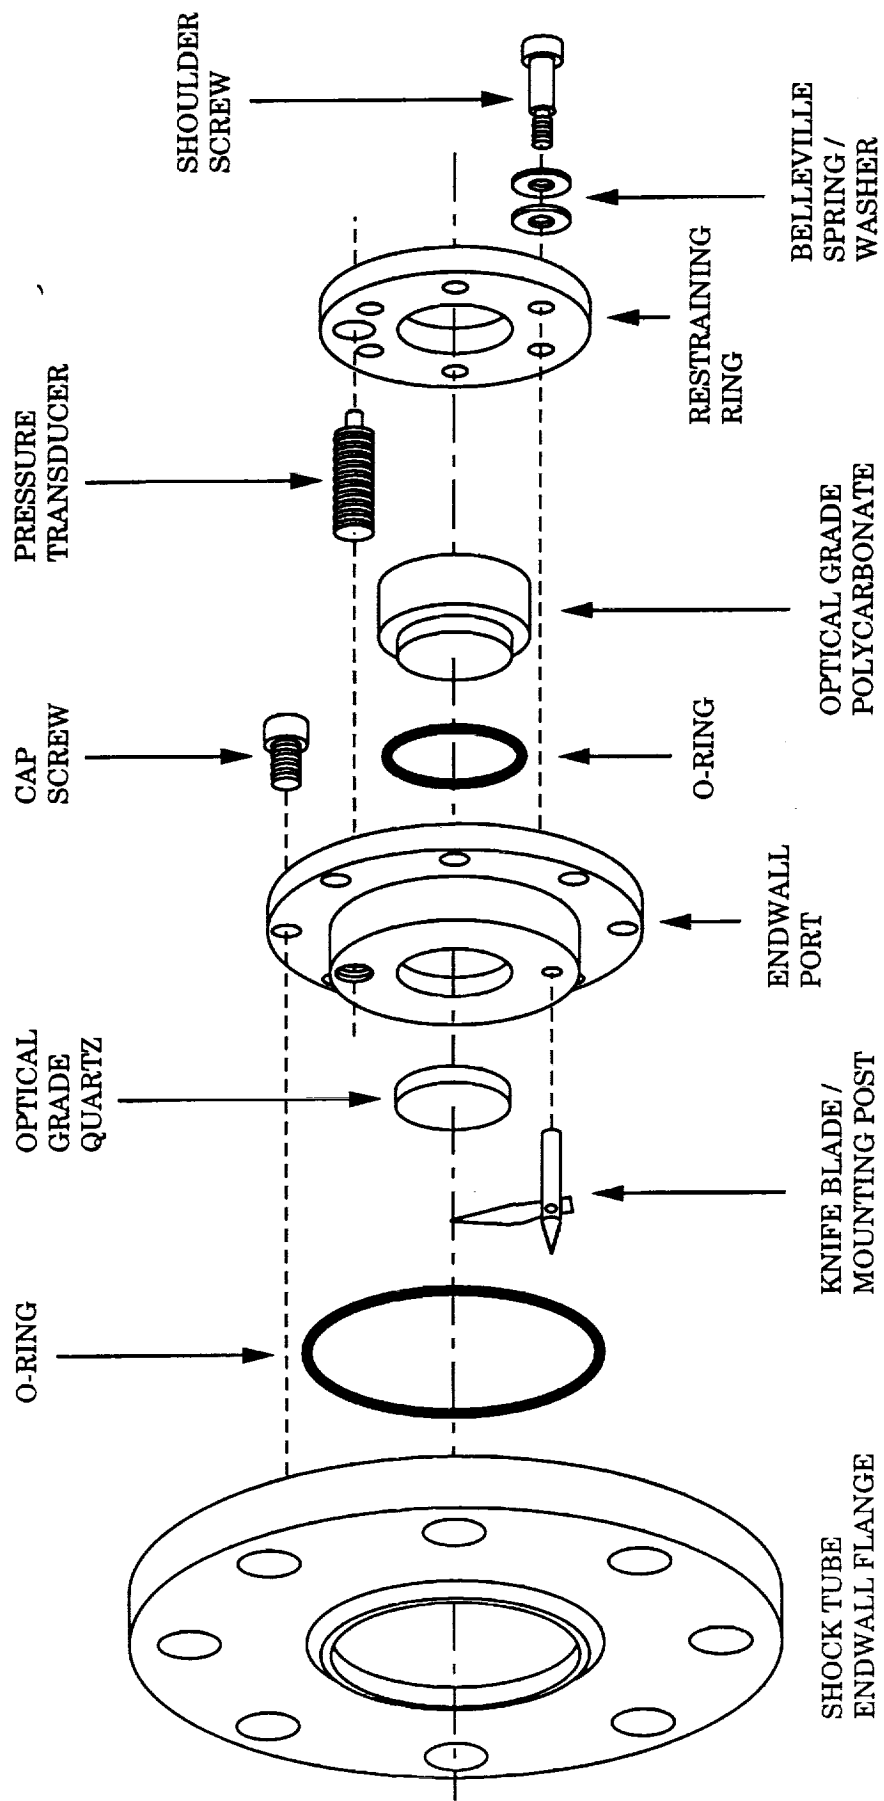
Endwall observation window, knife blade mount, and pressure transducer assembly.
